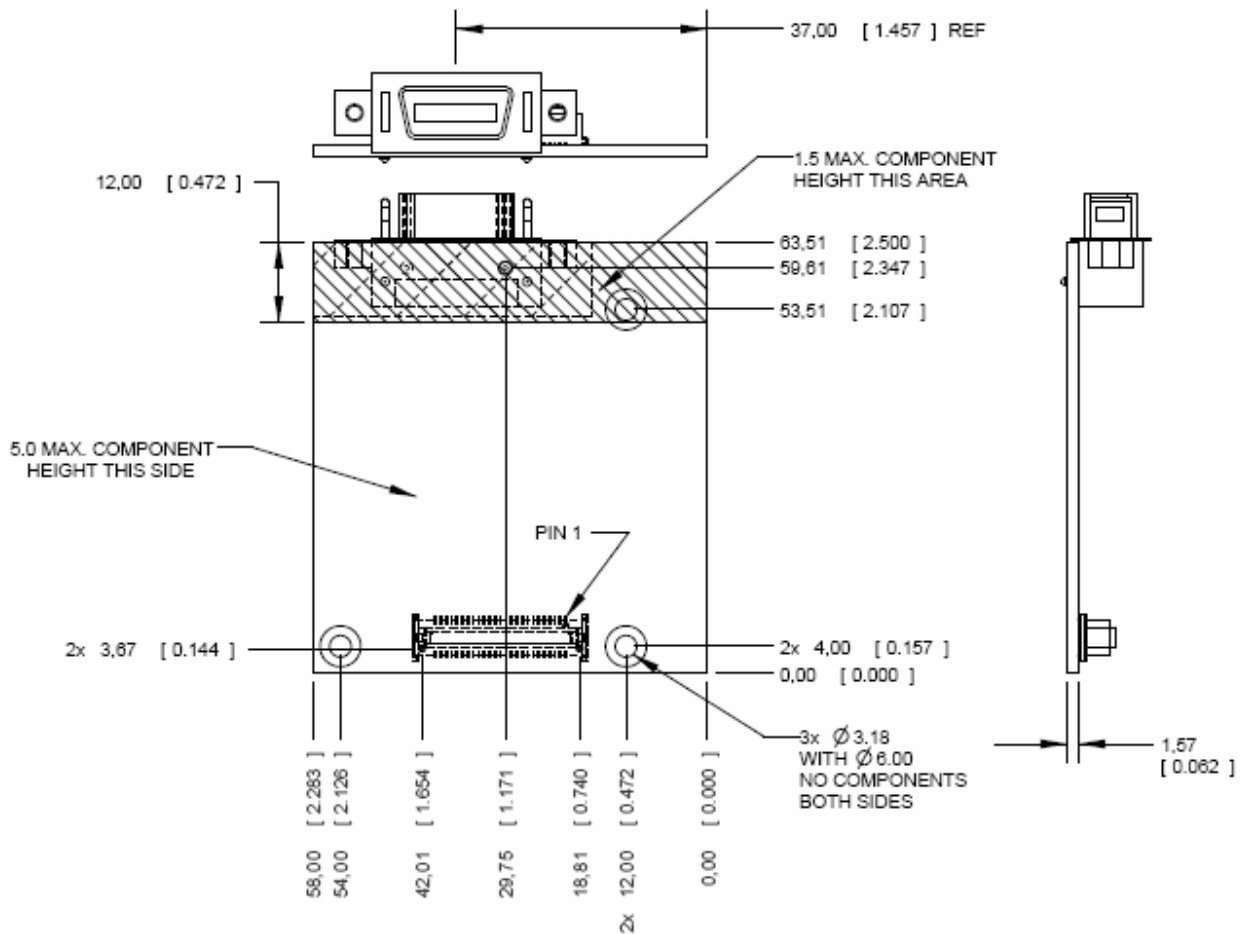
InfiniBand* I/O Module Dimensions; Top and Side Views
